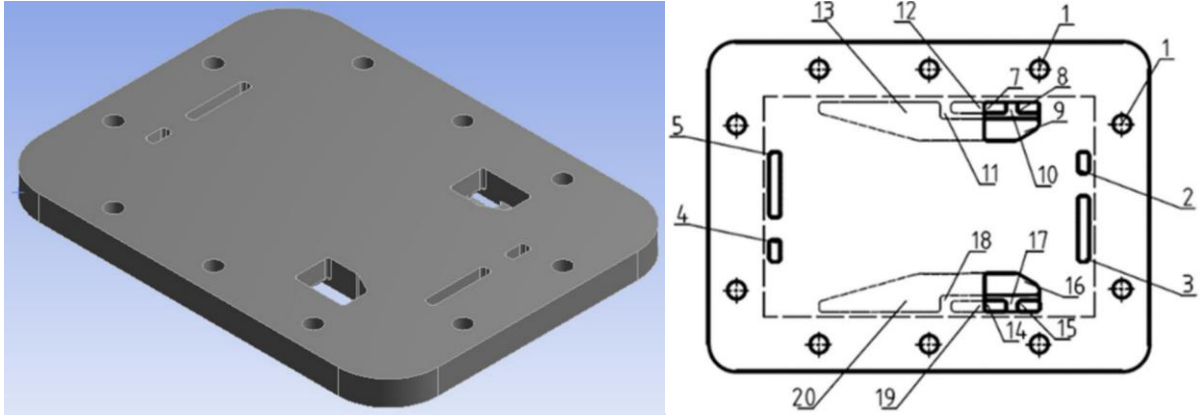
Endplate design for PEMFC, with holes for clamping bolts (1). Source: [79].
